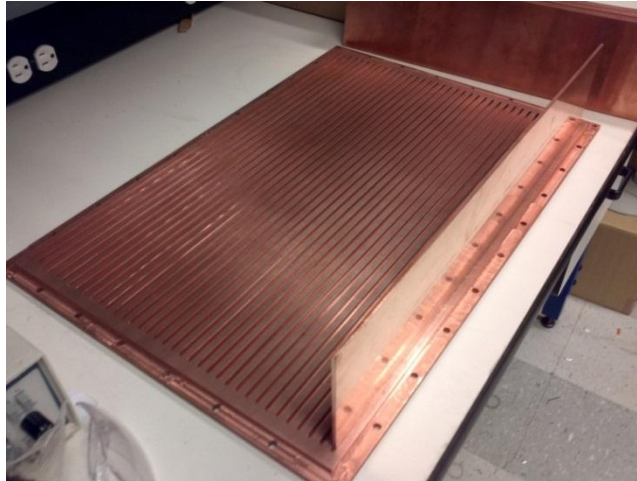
Machined fin grooves in hot side fin array baseplate
